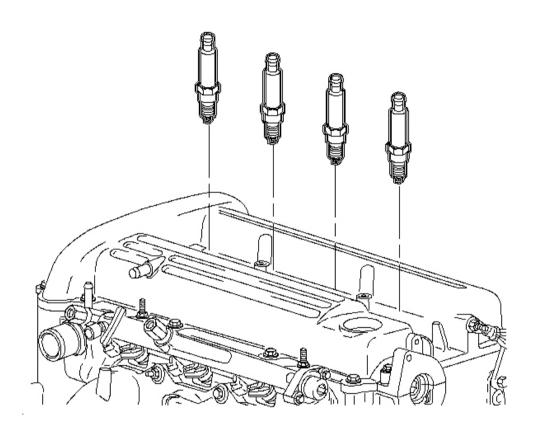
View Of Spark Plugs Courtesy of GENERAL MOTORS CORP.
